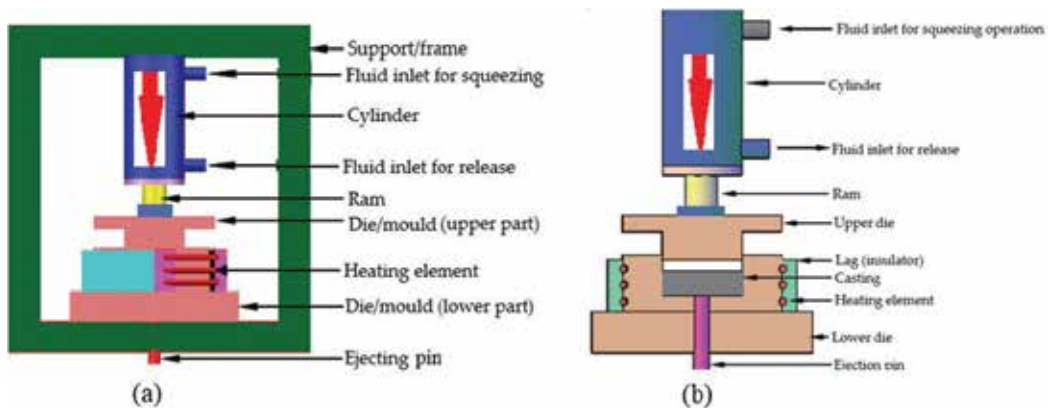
Schematic of hydraulic or mechanical press: (a) SCIM assembly with heating unit and (b) SCIM exploded diagram.
